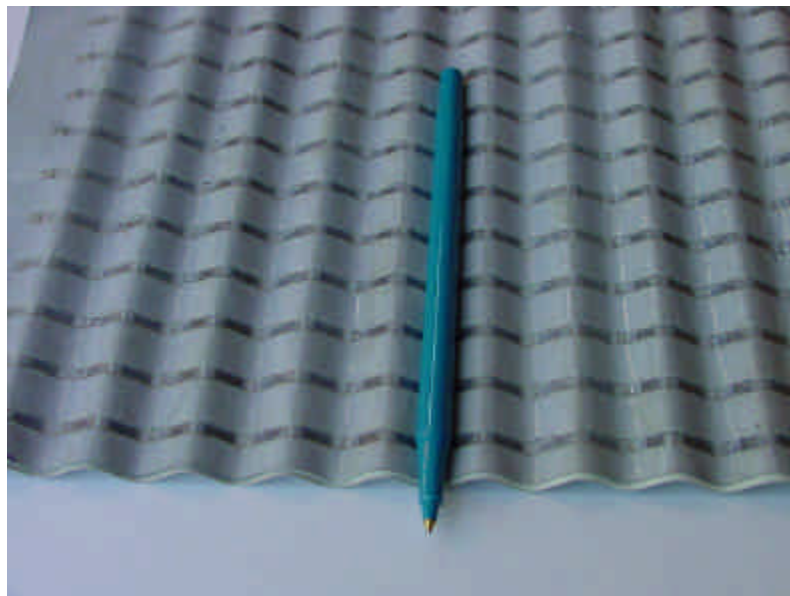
A Fluted Membrane Leaf Formed by the Ultrasonic Welding Process
